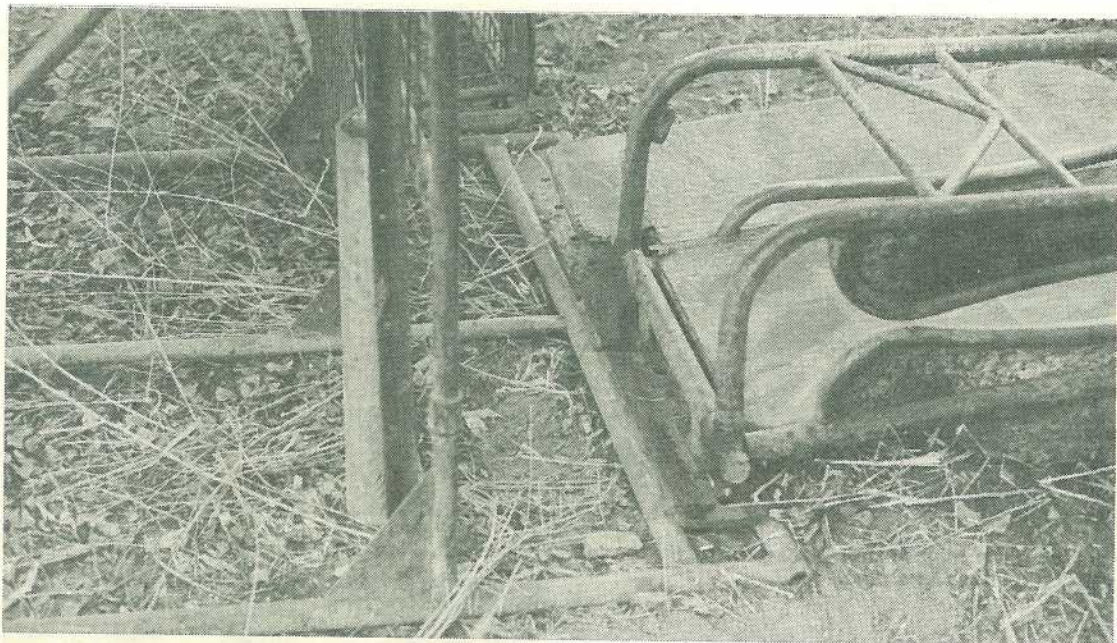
The cradle bedding legs are welded to grader blade cutting edges which in turn are welded to a pipe frame.
